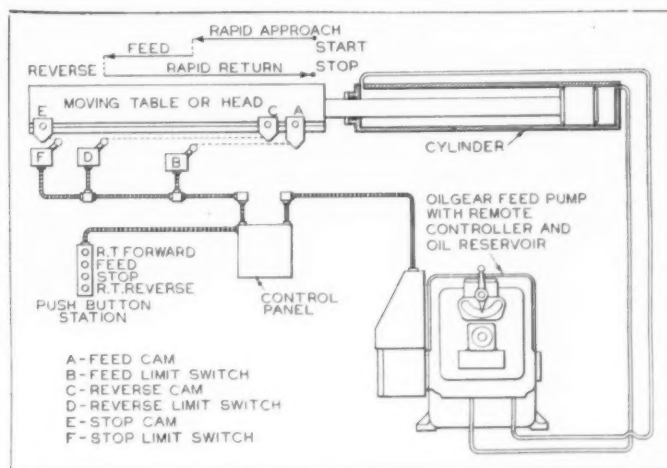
Diagram of Electric and Hydraulic Equipment Applied to Machine Tool with One Feed and Remote Control
